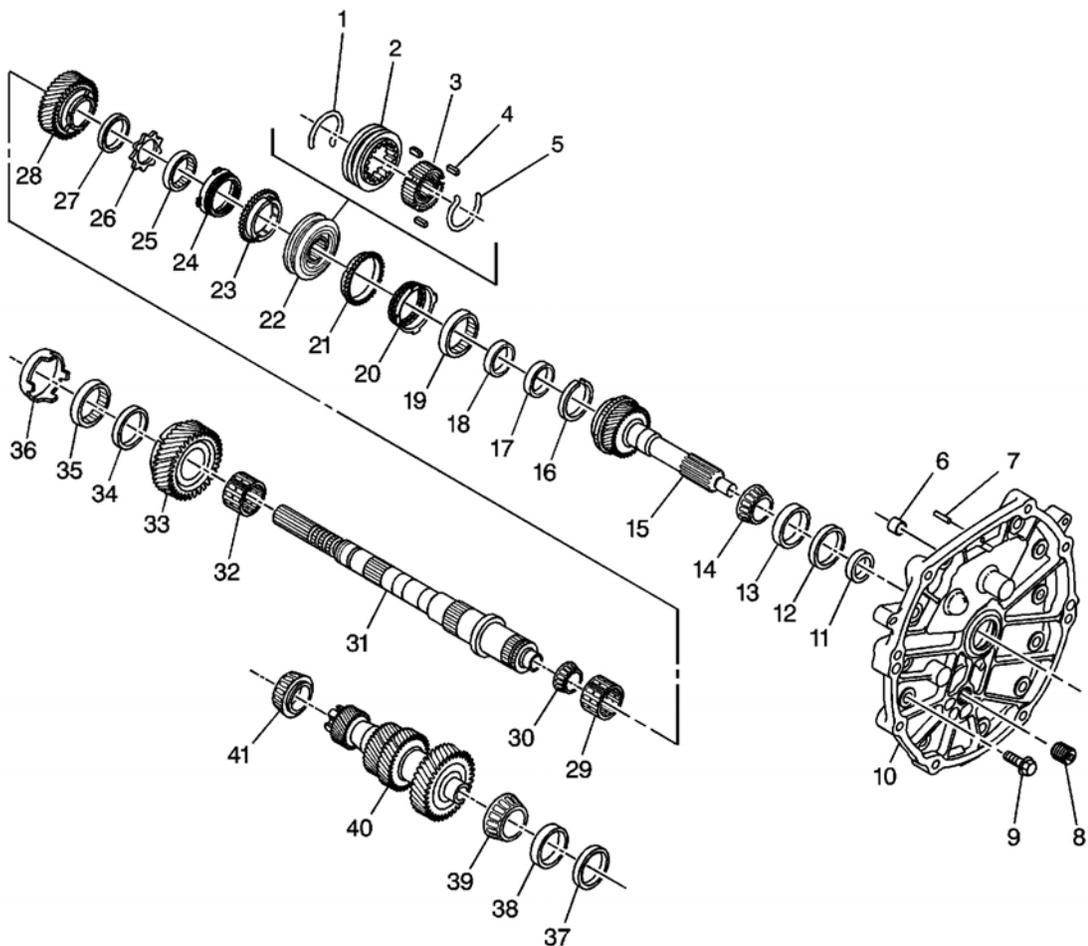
Adapter Plate and Gears Component Location (GTO)
